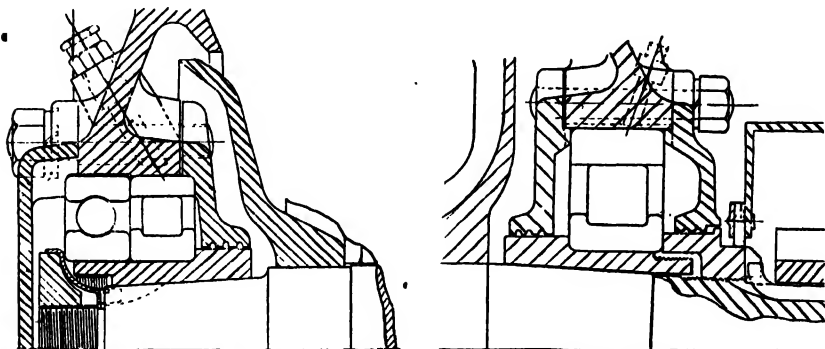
A.—Mounting of Roller Bearings in Traction Motors.
